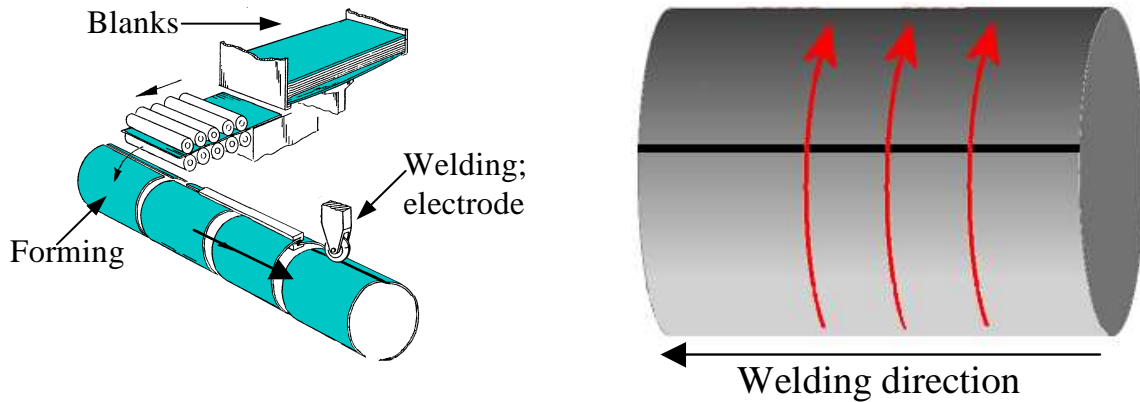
The left-hand side shows the roll-forming process just before welding. The right-hand side picture shows the welding direction of the can cylinder in contrast to the rolling direction of the material, C-grain orientation.
